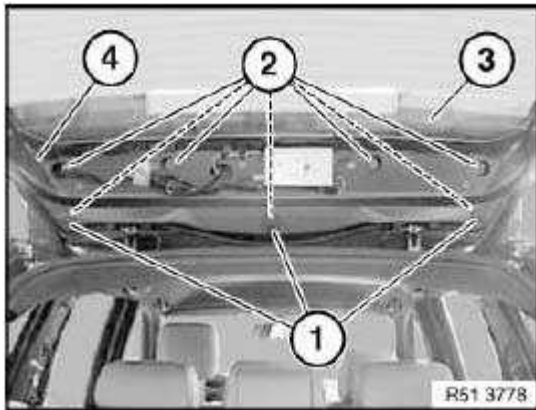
Rubber Plug, Nuts And Rear Spoiler
